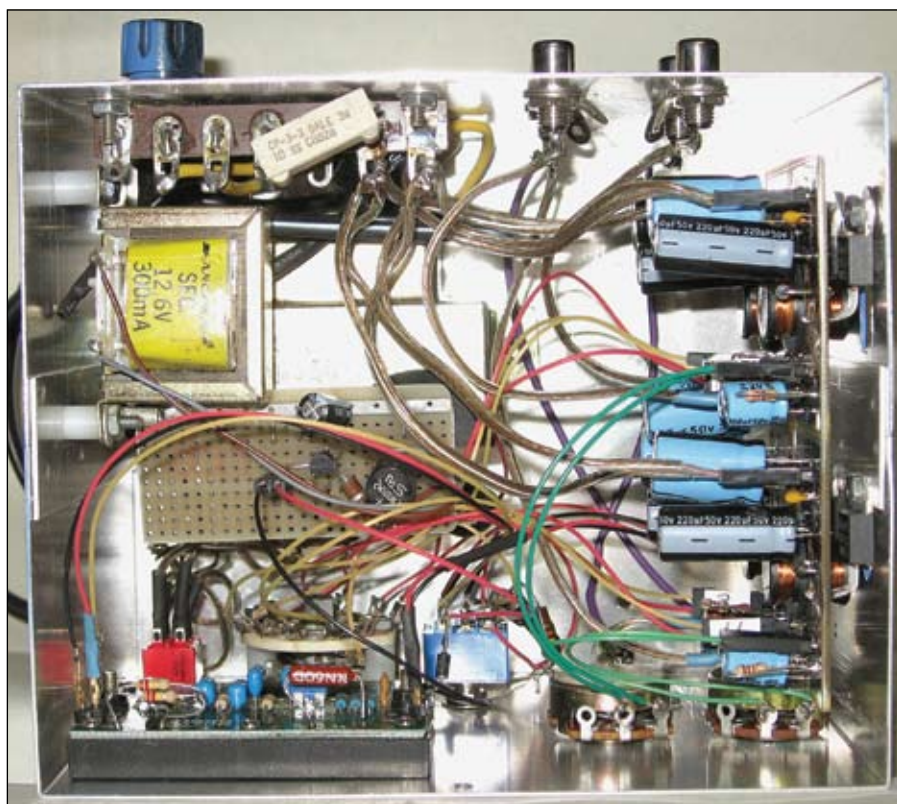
Underchassis view of the completed power supply. The components used for the main rectifier circuit are mounted on a terminal strip shown at the top left.
